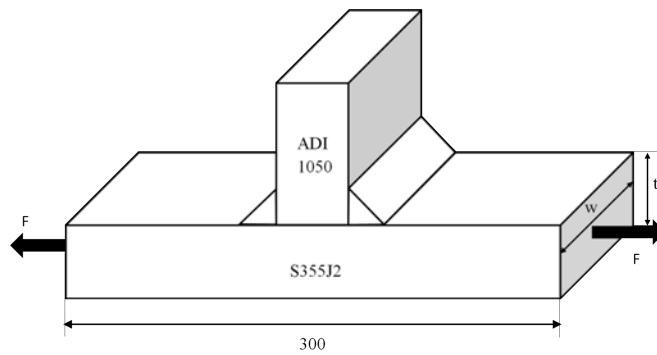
Geometry of the T nlc fillet-welded joints under axial load
